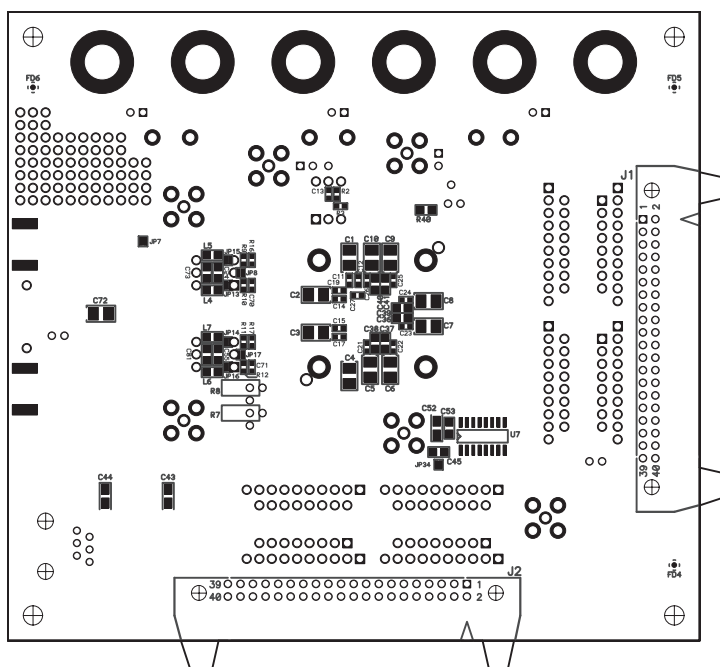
AD9773 Evaluation Board Components, Bottom Side
